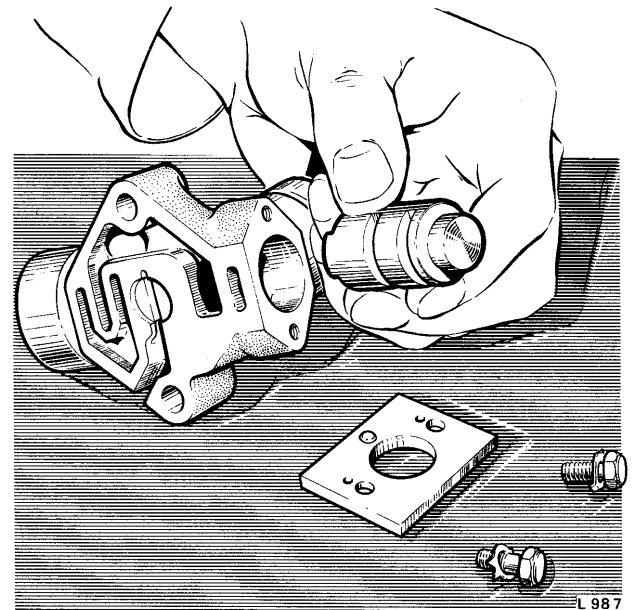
REMOVING THE G2 VALVE AND SLEEVE
